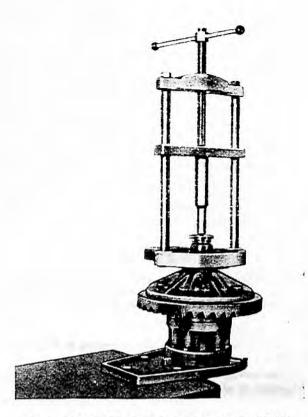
REMOVING DIFFERENTIAL BEARING CONES
